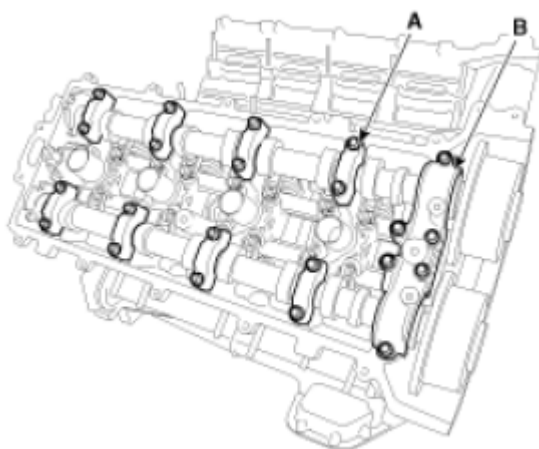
Identifying Bearing Cap And Thrust Bearing Cap
